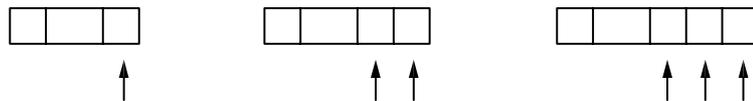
Location of datum letter symbol(s) in the tolerance frame
